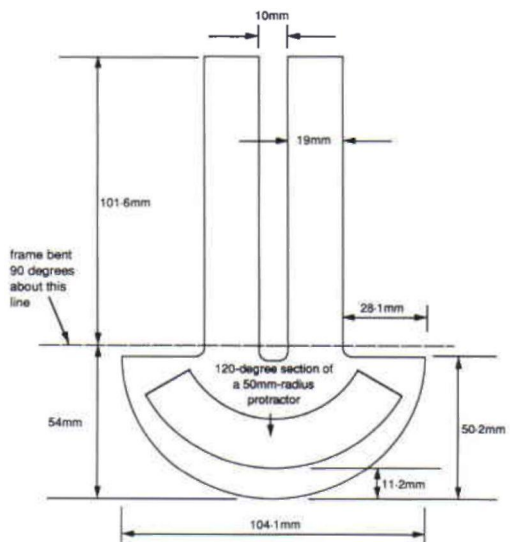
FRAME: The frame is cut from a 1.5mm-thick aluminium plate to the dimensions shown then bent at a right-angle along the dashed line.
